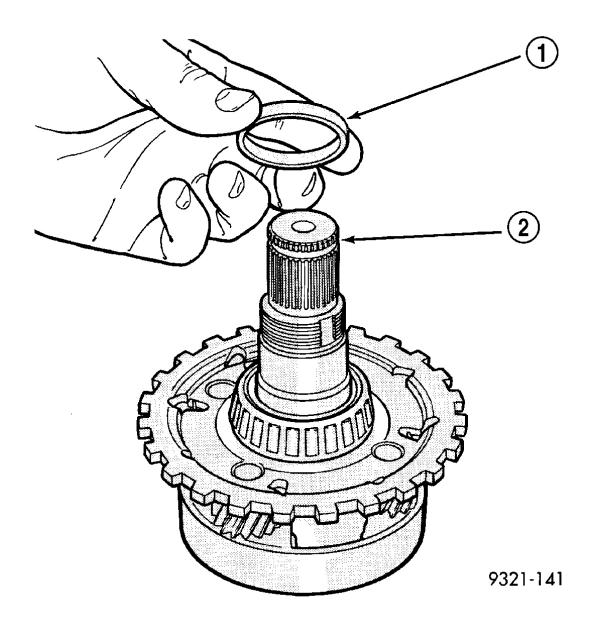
Installing Support Plate Courtesy of CHRYSLER LLC
